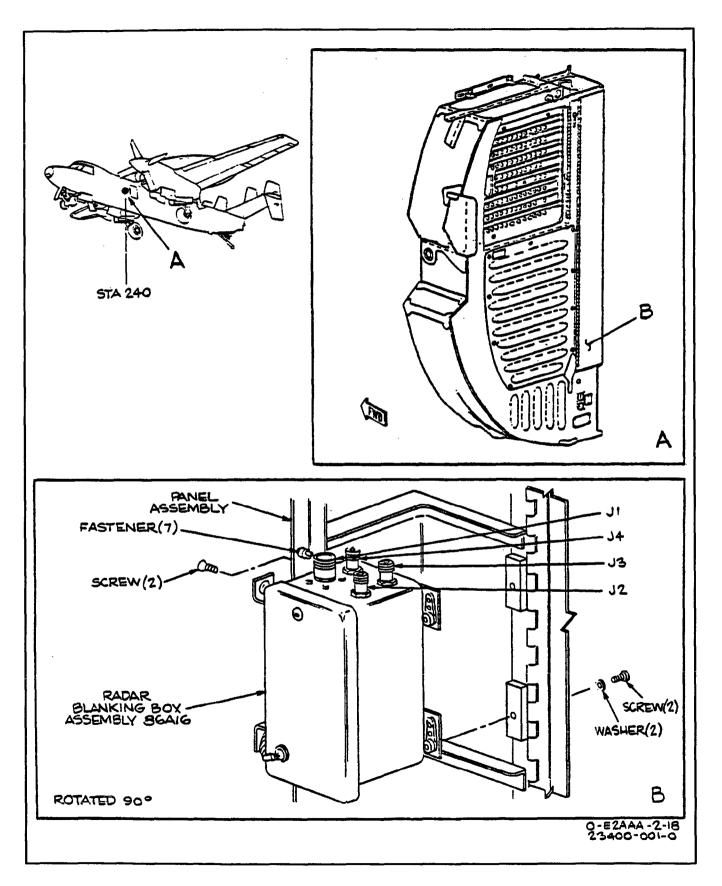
Removal and Installation of Radar Blanking Box Assembly
